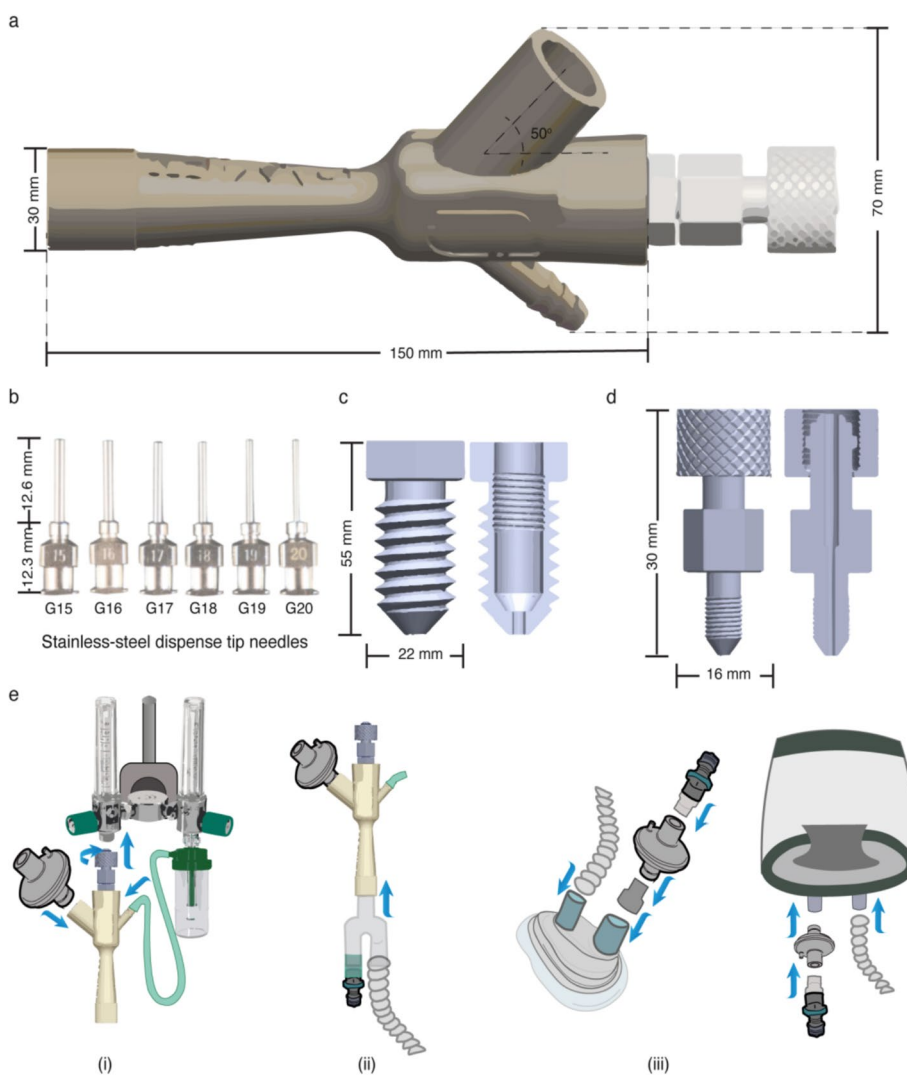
Design and Assembly of the OxyJet CPAP. a. Isometric view of the OxyJet flow generator. b. Stainless steel dispense tip needles used as flow generator nozzles. c. Cross-sectional view of the double-sided connector. d. Cross-sectional view of the DISS female adapter. e. Step-by-step assembly of the OxyJet CPAP system. (i) The OxyJet flow generator is connected to a primary flowmeter via the DISS adapter. A second flowmeter with a bubble humidifier is attached to the secondary oxygen inlet via an oxygen tube. A viral/HEPA filter is attached to the air inlet port. (ii) One end of the breathing circuit is connected to the outlet port of the flow generator. (iii) The other end of the breathing circuit is connected to the inhalation port of the CPAP mask/helmet. Finally, a viral/HEPA filter followed by an adjustable PEEP valve is attached to the exhalation port of the CPAP mask/helmet
